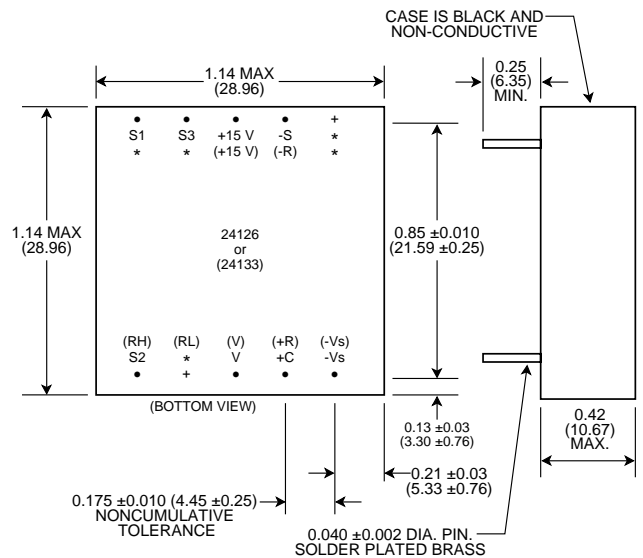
TRANSFORMER MECHANICAL OUTLINES
